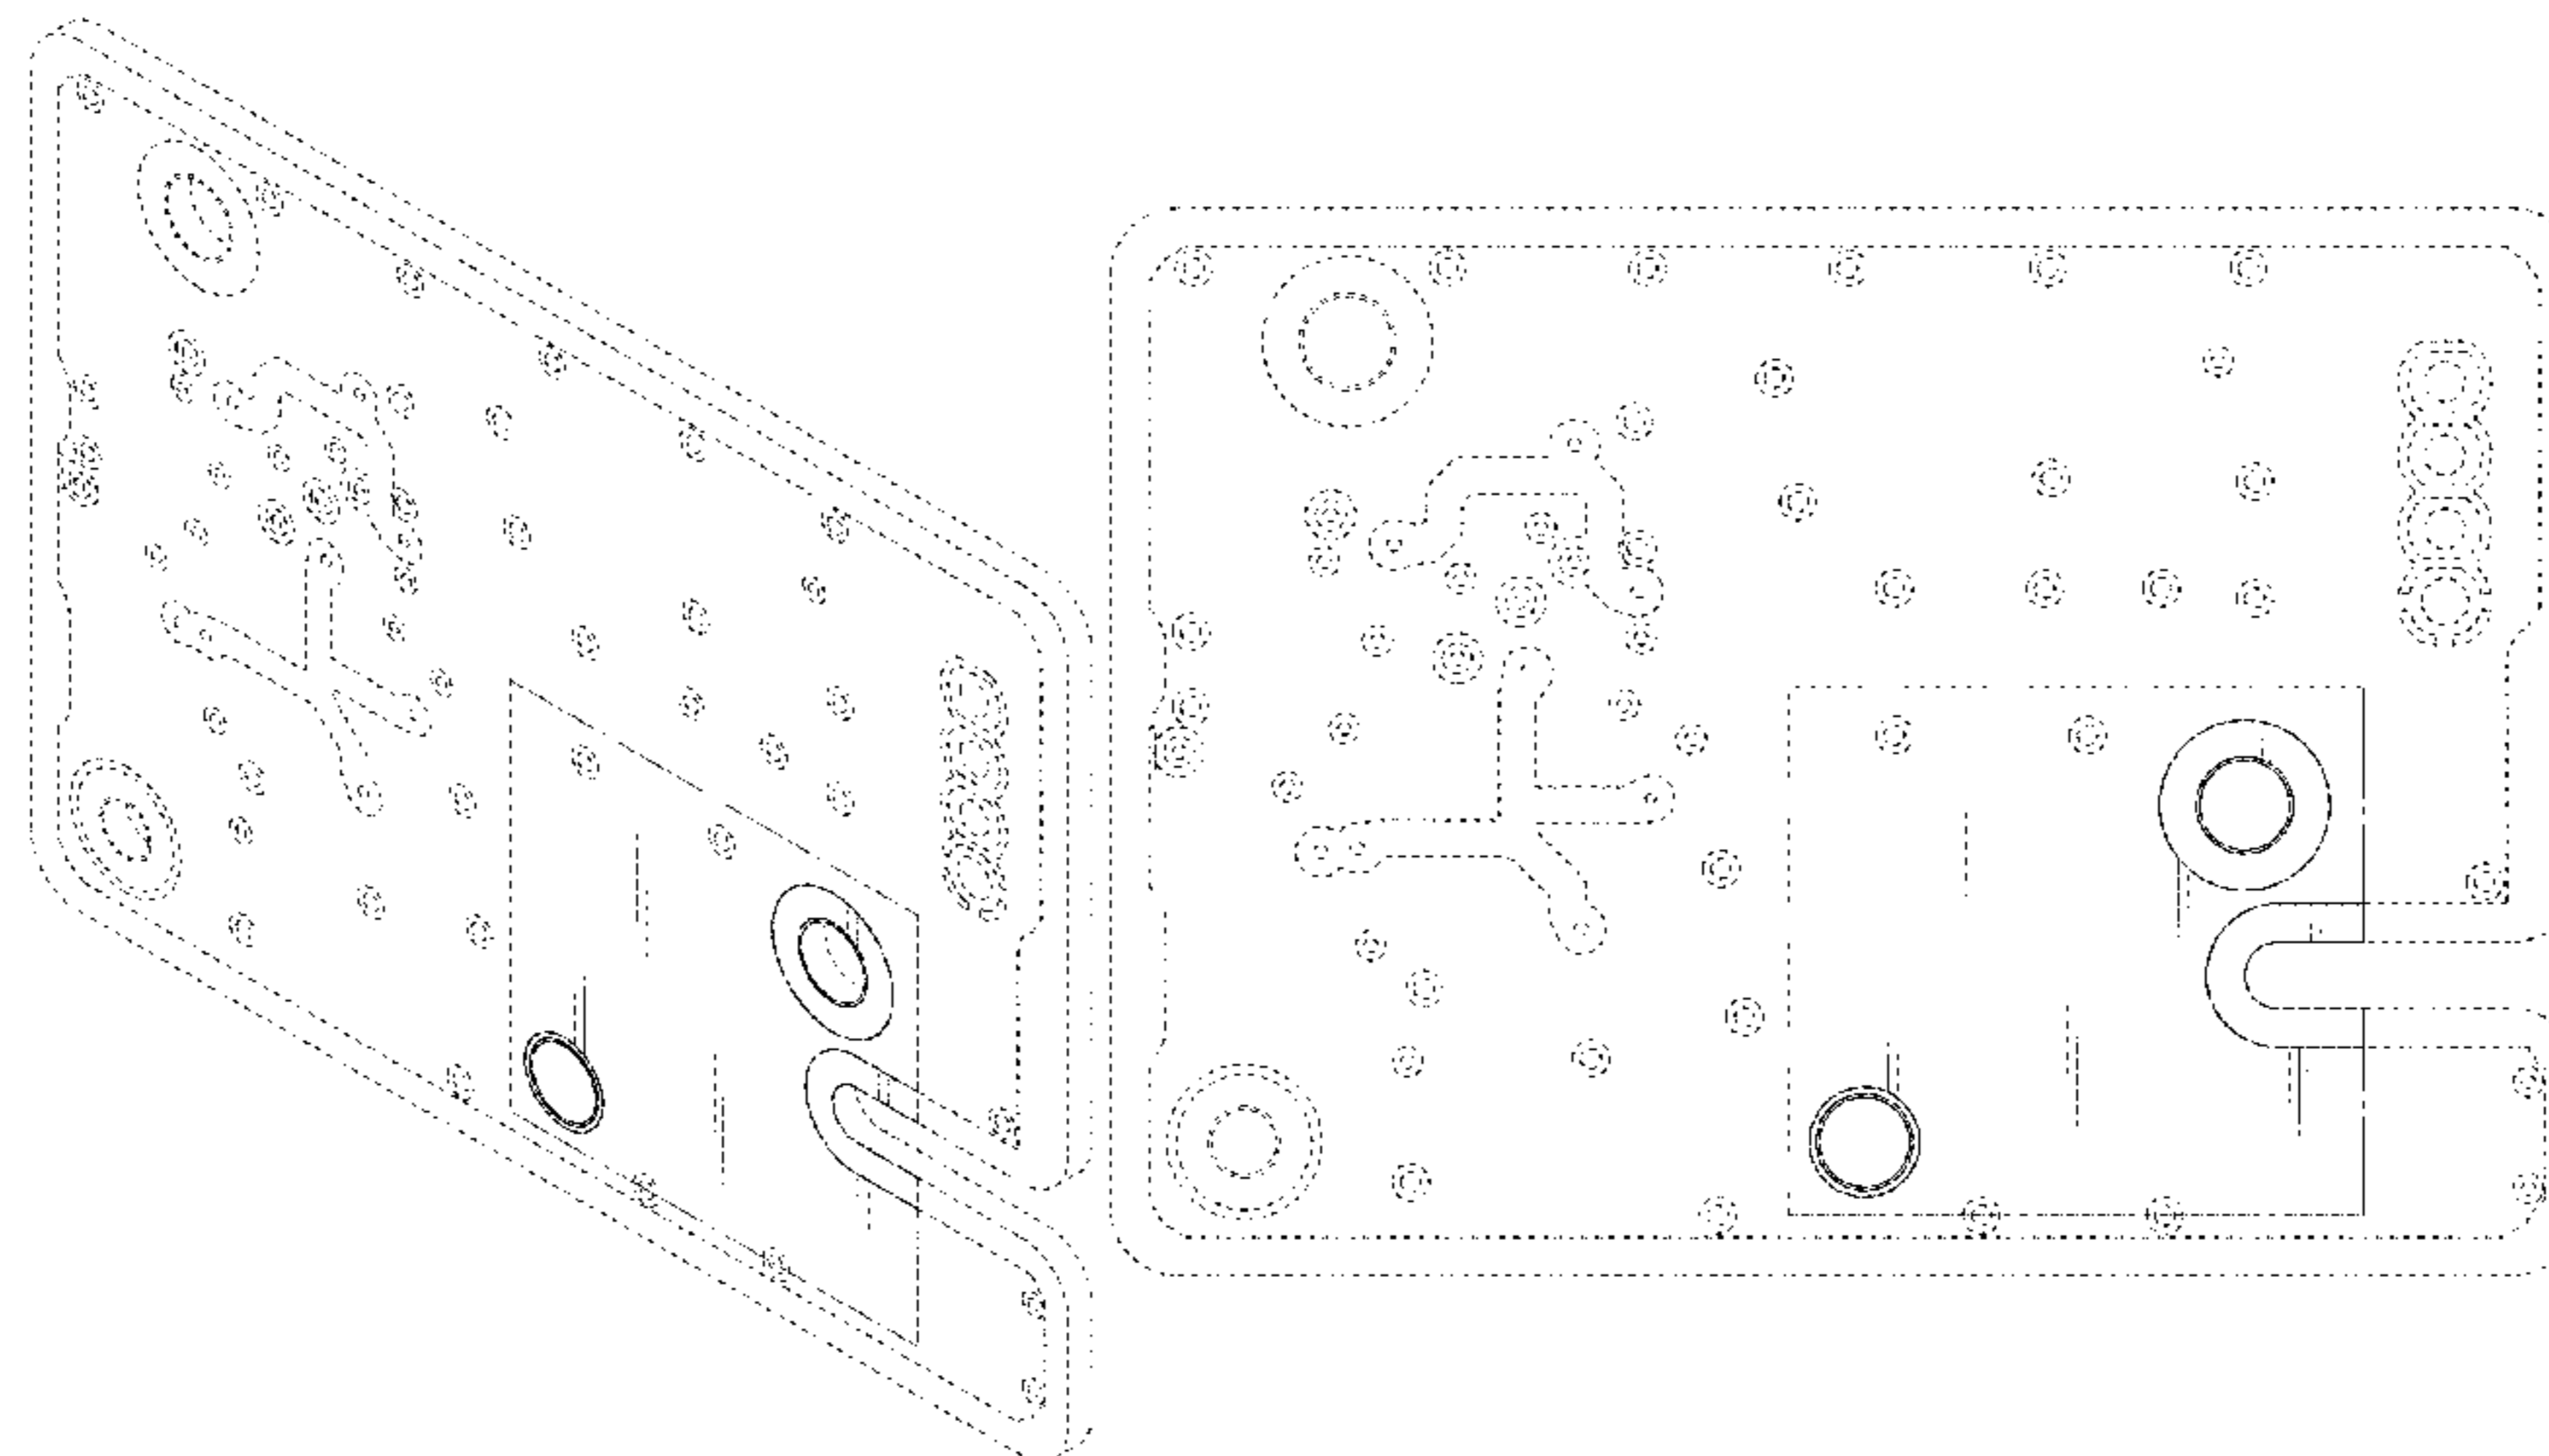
is a rear, top, left side perspective view of a circuit board showing our new design;
